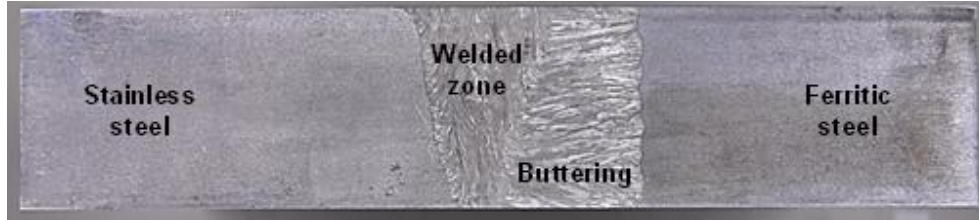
Macrograph of the studied V-butt dissimilar weld.
